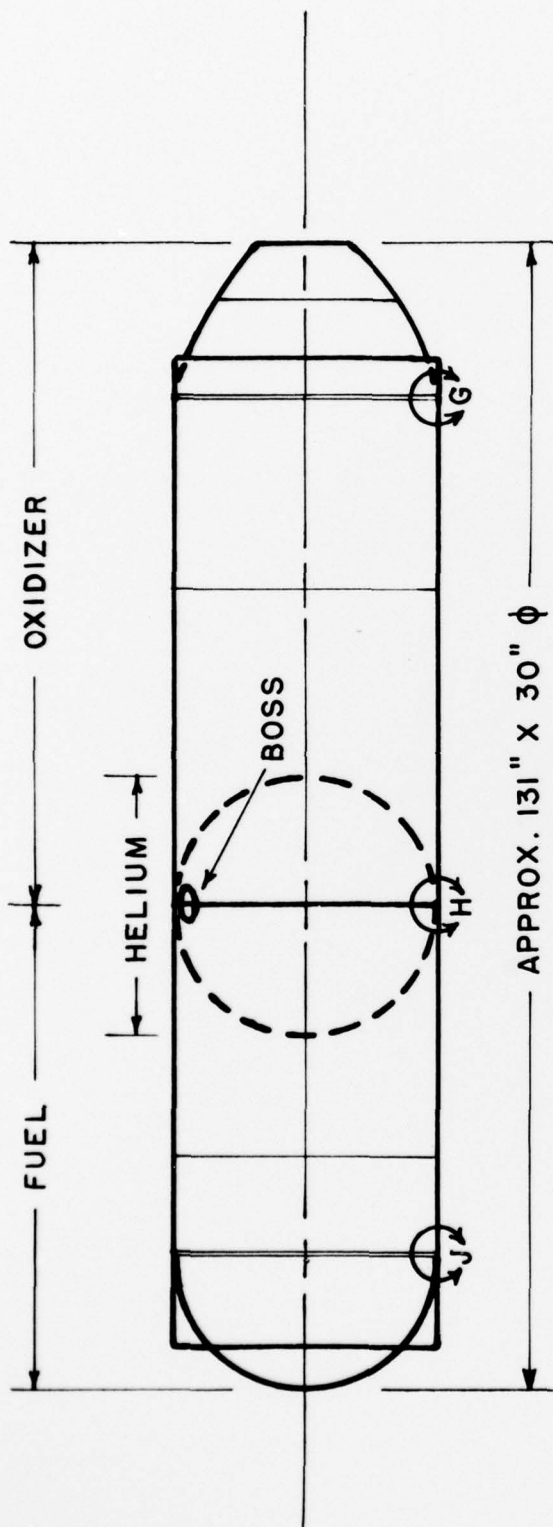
Schematic of Vanguard Tank Assembly Showing Locations of Girth Welds only
